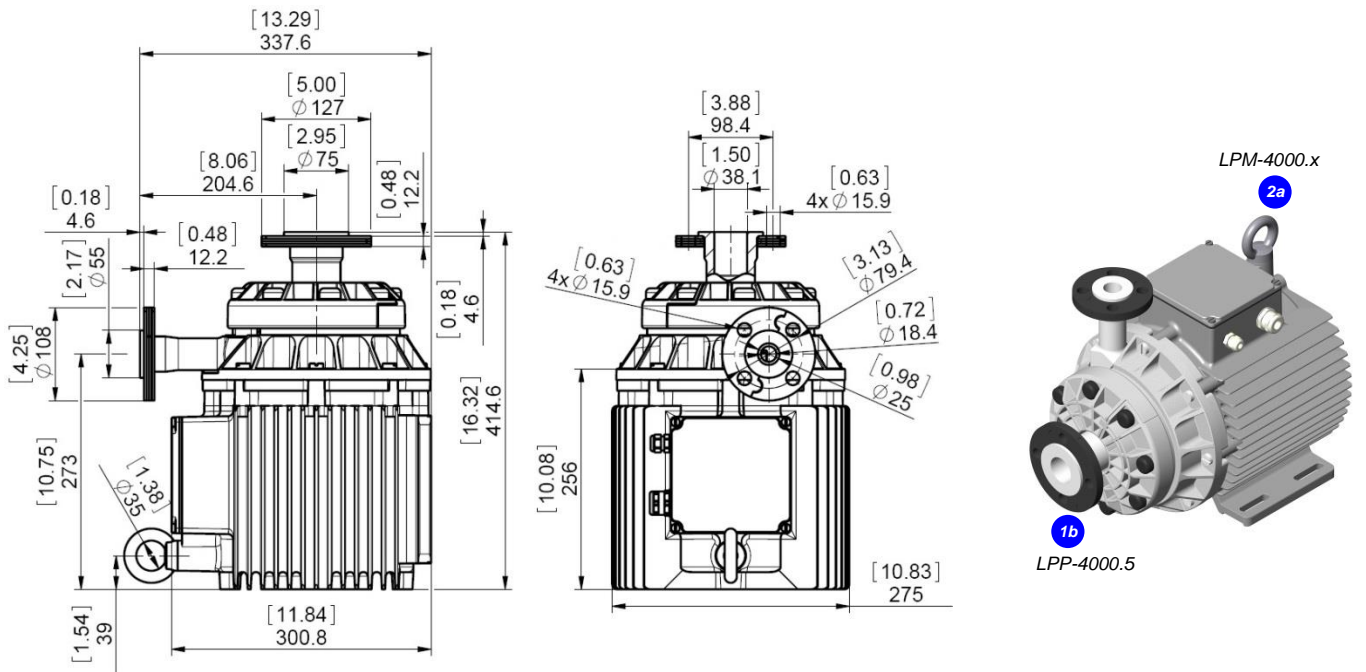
Dimensions of motor LPM-4000.x with pump head LPP-4000.5
